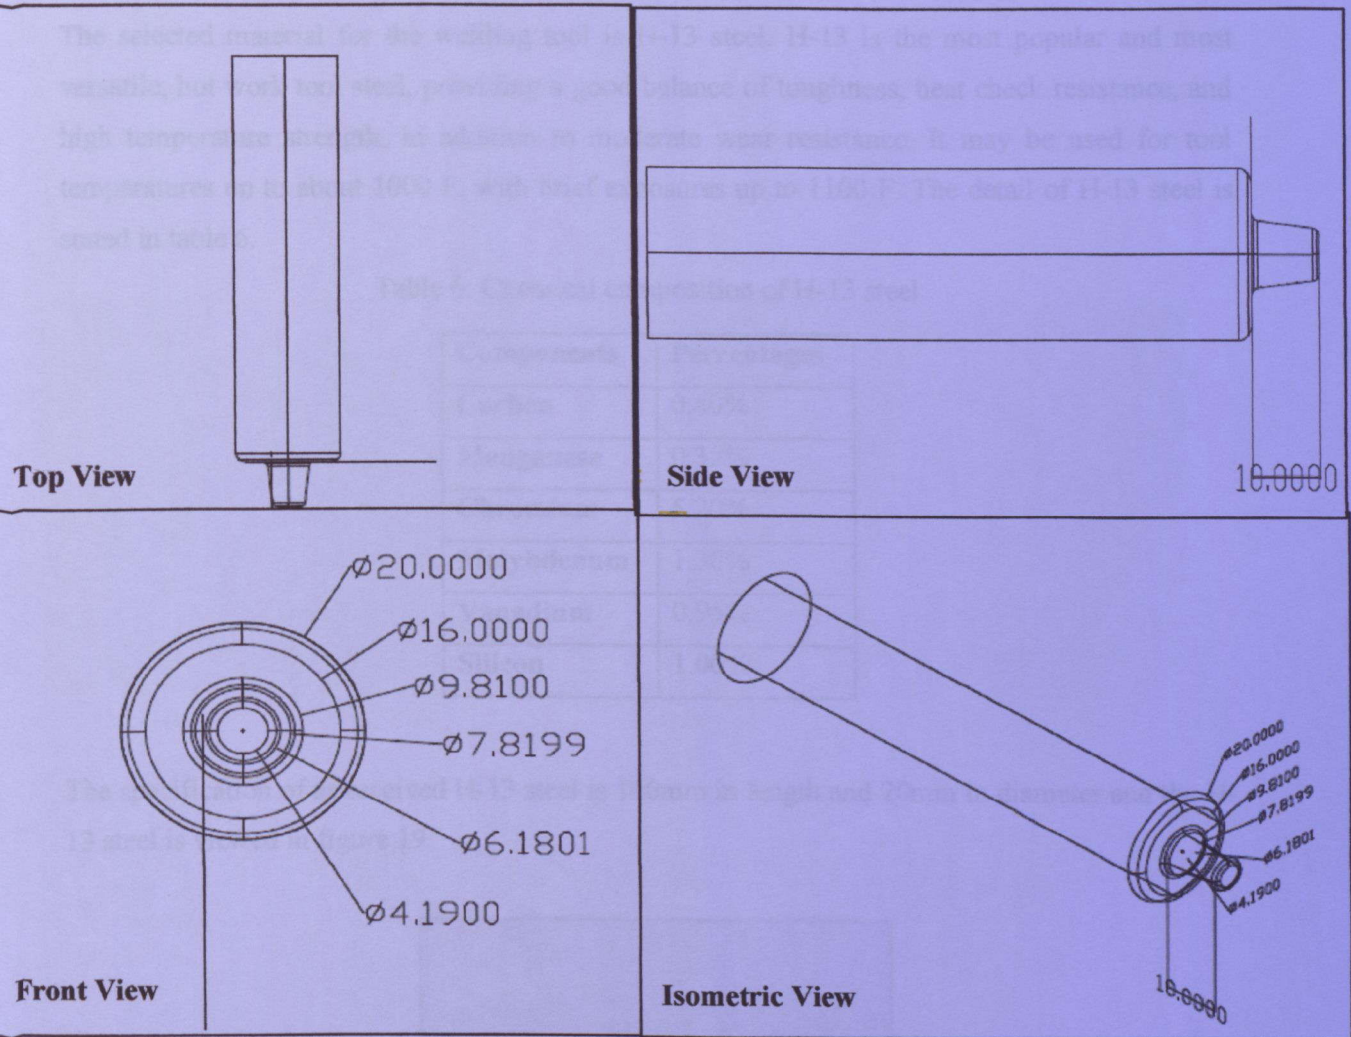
FSW AUTOCAD drawings with dimension in unit of mm
